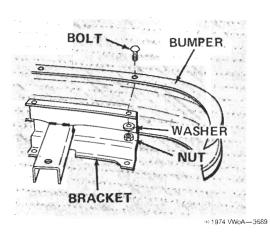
Nuts and bolts that hold late bracket on bumper,
